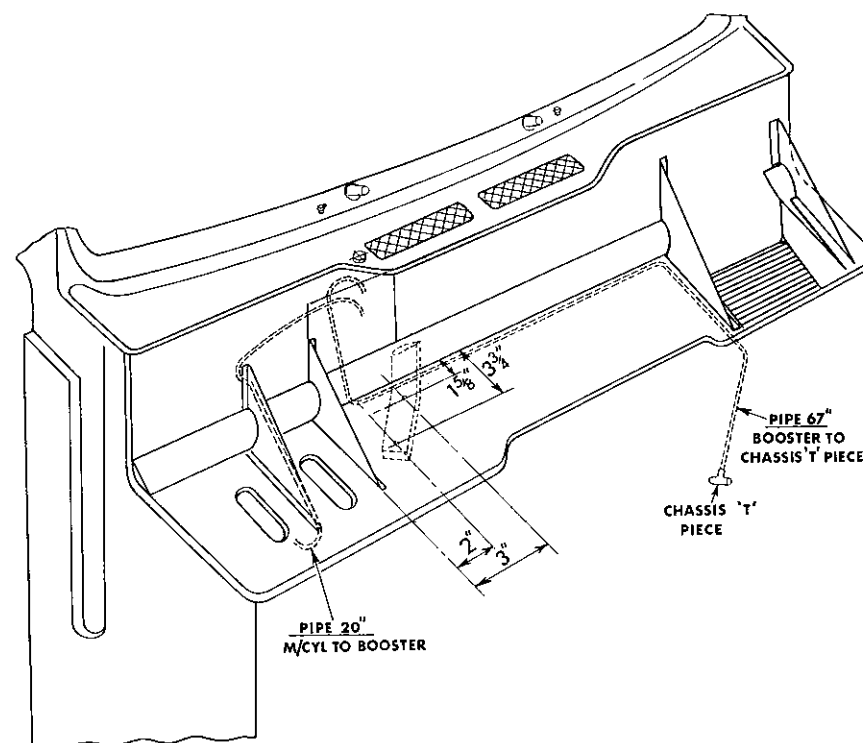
Bulkhead shelf drilling location for lower power stop mounting bracket
